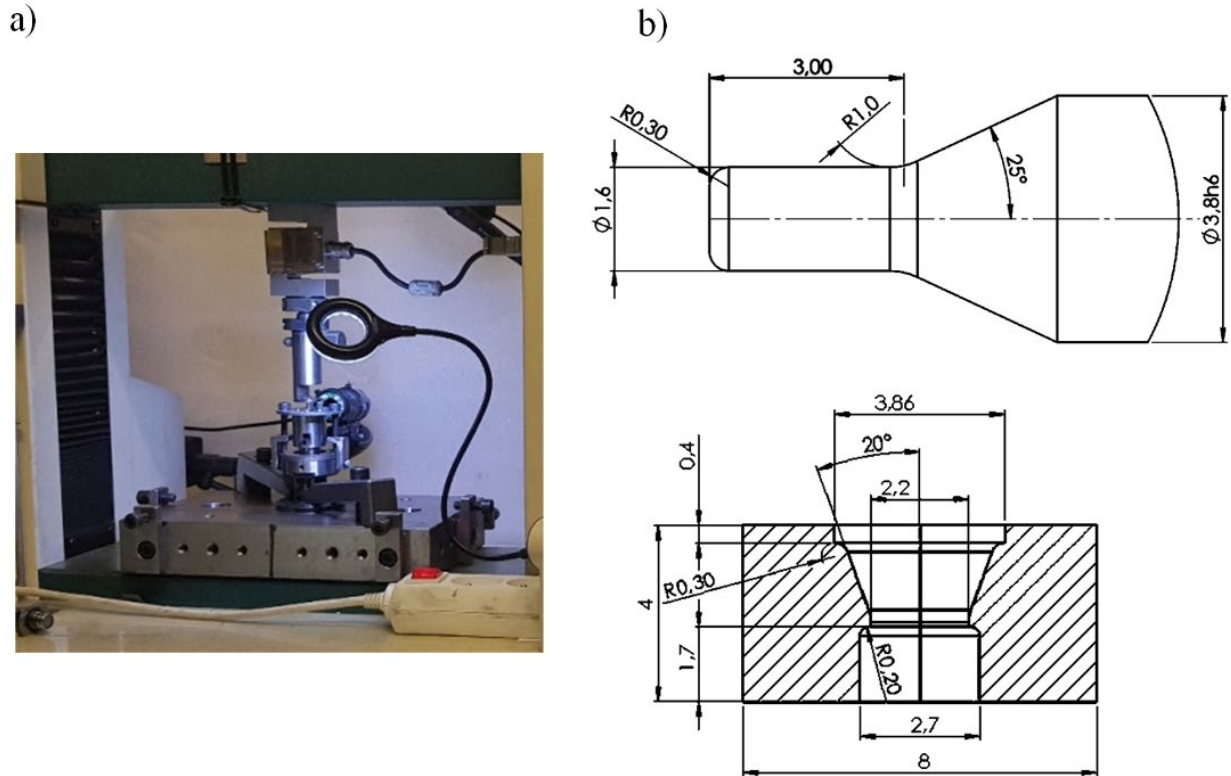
Setup for micro-drawing (a) and dimensions of the tools used (b).
